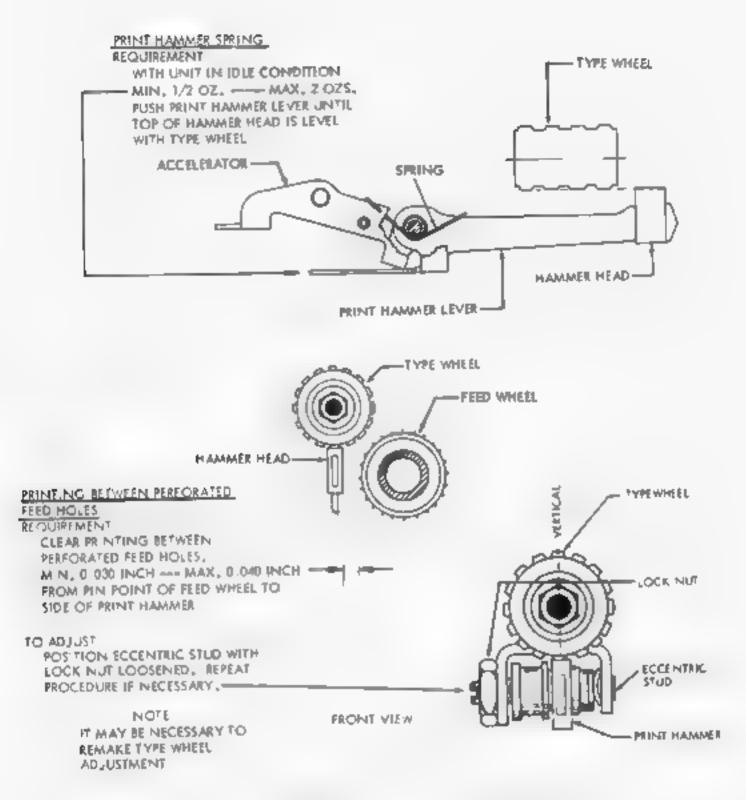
PRINTING MECHANISM FOR FULLY PERFORATED TAPE
